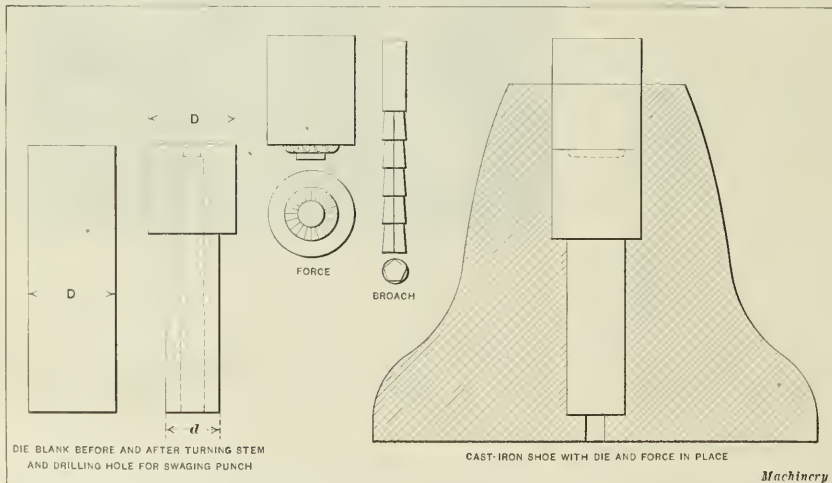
Die Blank, Force for making Die Cavity, Broach for Pentagonal Hole in Die, and Holder in which Die Cavity is formed by Force
